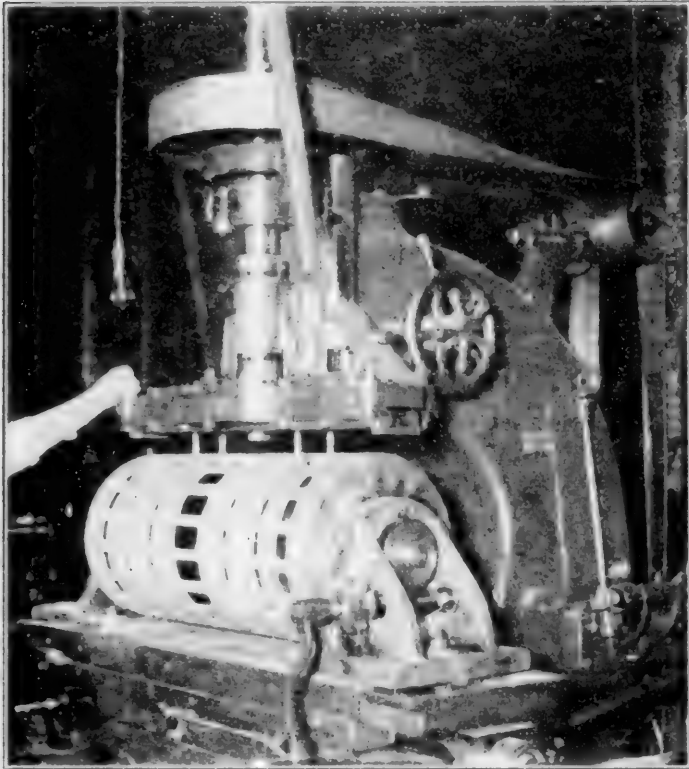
IMPROVED METHOD OF REMOVING PISTON VALVE BUSHINGS.
